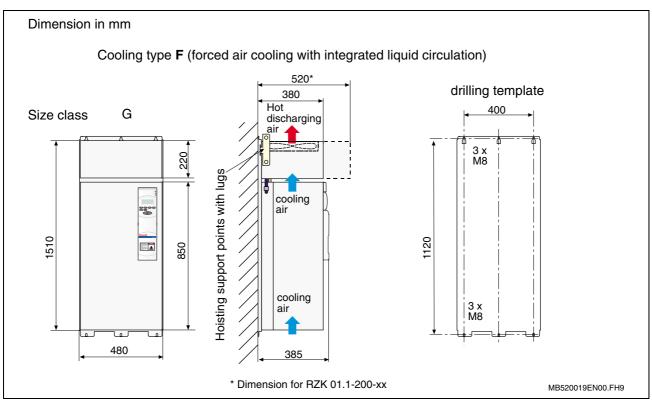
Dimension sheet of inverter, size class G with cooling type F
